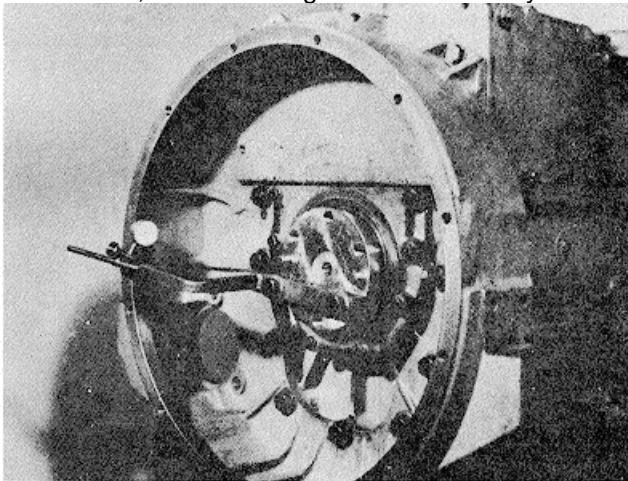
, (N 11447). Indicating flywheel housing bore
